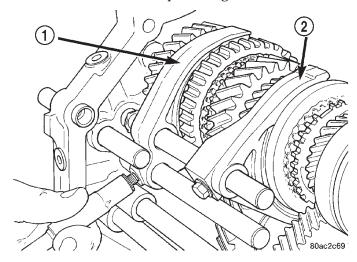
Remove Shift Fork To Shift Rail Bolts
